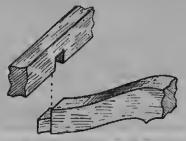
Joint of Plant Stand's Lower Rails.
